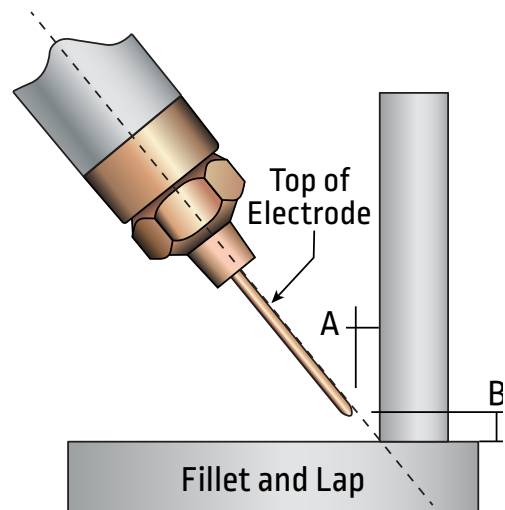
Electrode Location to Joint Line—Horizontal Fillet and Lap Welds
